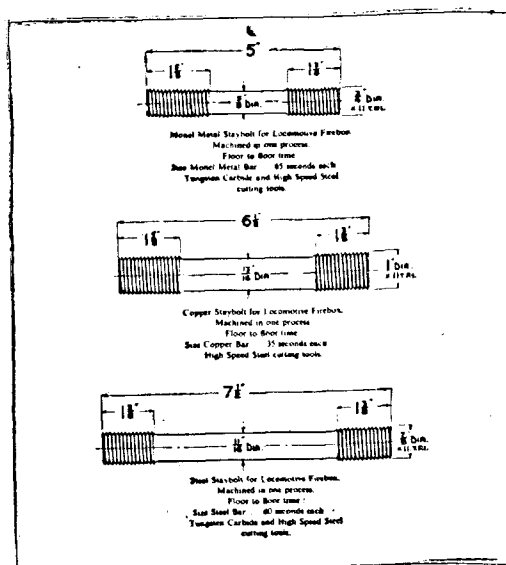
Production times for Firebox Staybolts on No. 3A Staybolt Capstan Lathe.
